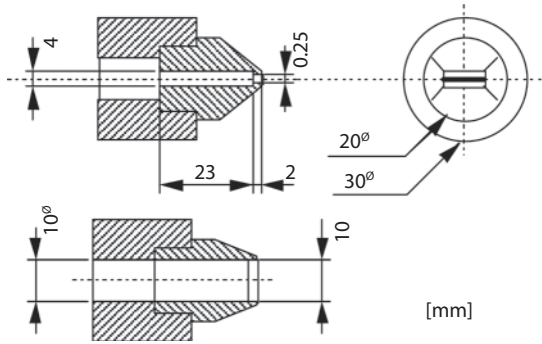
Slit-type air jet nozzle. Cross-sectional side-view (figure on left-side on top), top-view (figure on left-side on bottom) and the view from nozzle tip (right side). Unit of length is [mm].
